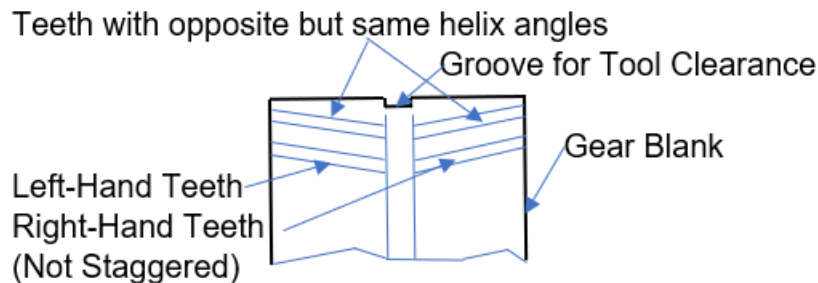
Double Helical Gear Teeth Arrangement (not staggered)
